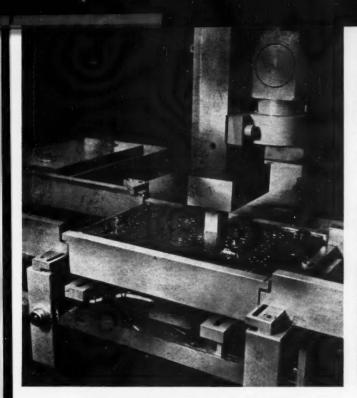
Close-up view of another head on the automatic assembly machine, with the magazine removed to show the panel and tooling.
